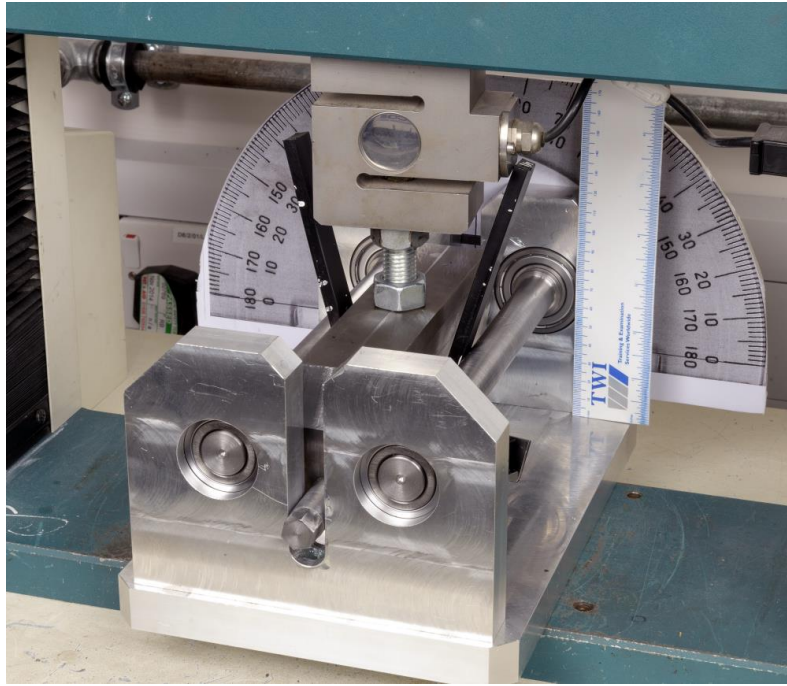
Completed guided side bend test at maximum bend angle of the test rig (TWI, 2016)
